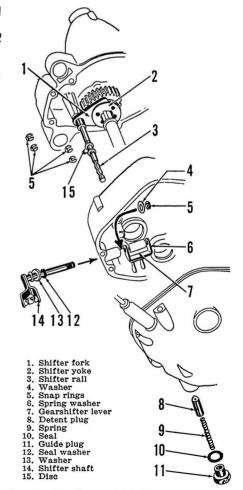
View of Mo-Ped two speed gear shift mechanism.
